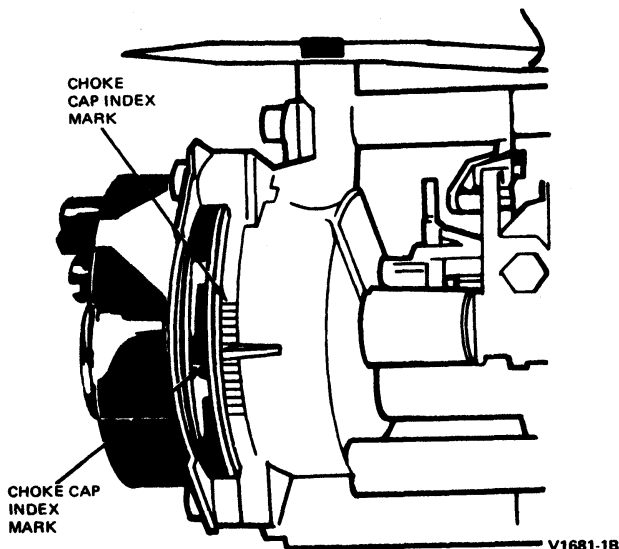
Automatic Choke Thermostatic Spring Housing Adjustment
